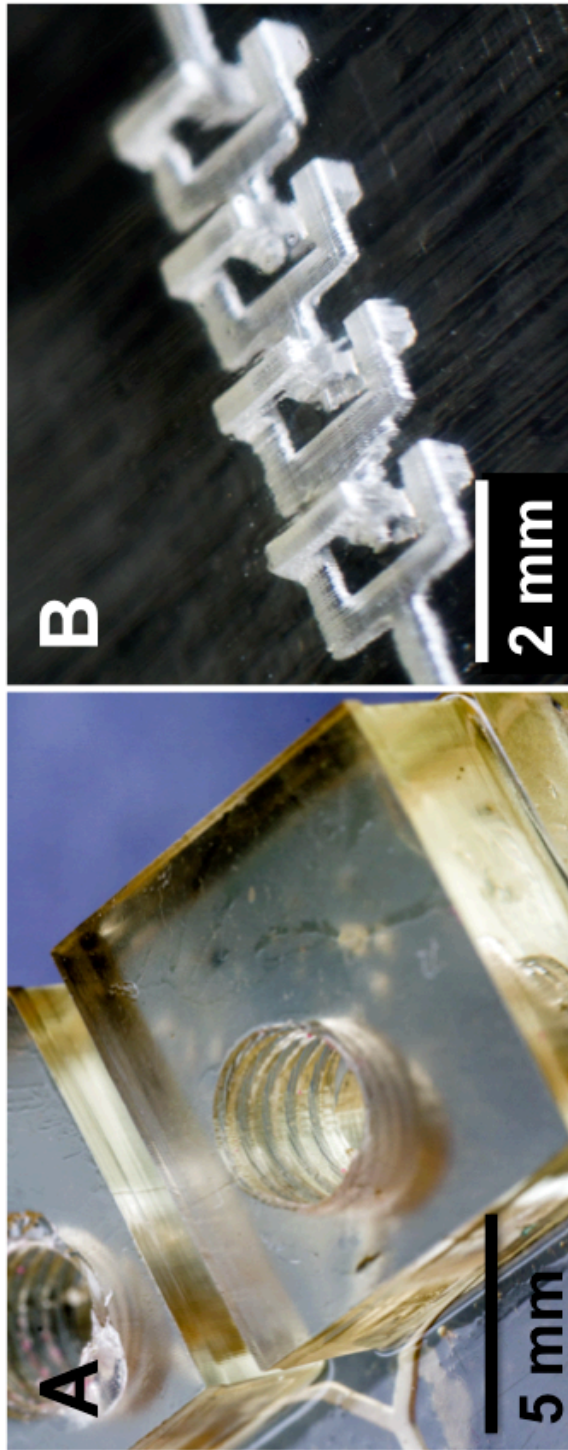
3D passive micromixer printed with clear resin. (A) Thread (10-32) for connecting the device to syringe pumps. (B) Four mixing units printed horizontally at 10 times larger than the original design to obtain channels that are 500 μm wide and deep.
